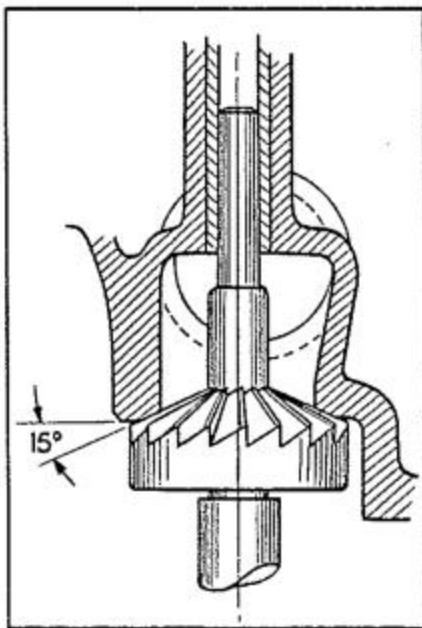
Use of 15° valve seating cutter to provide clearance of gases
